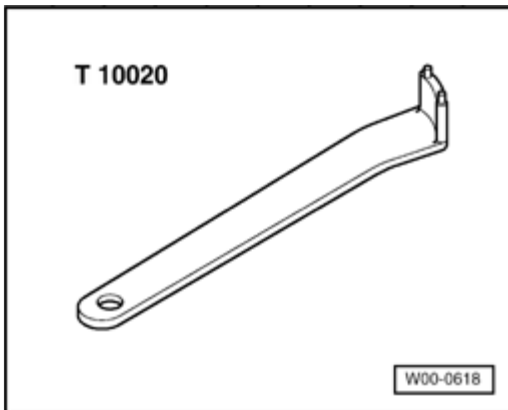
Identifying T10020 Two Hole Pin Wrench
